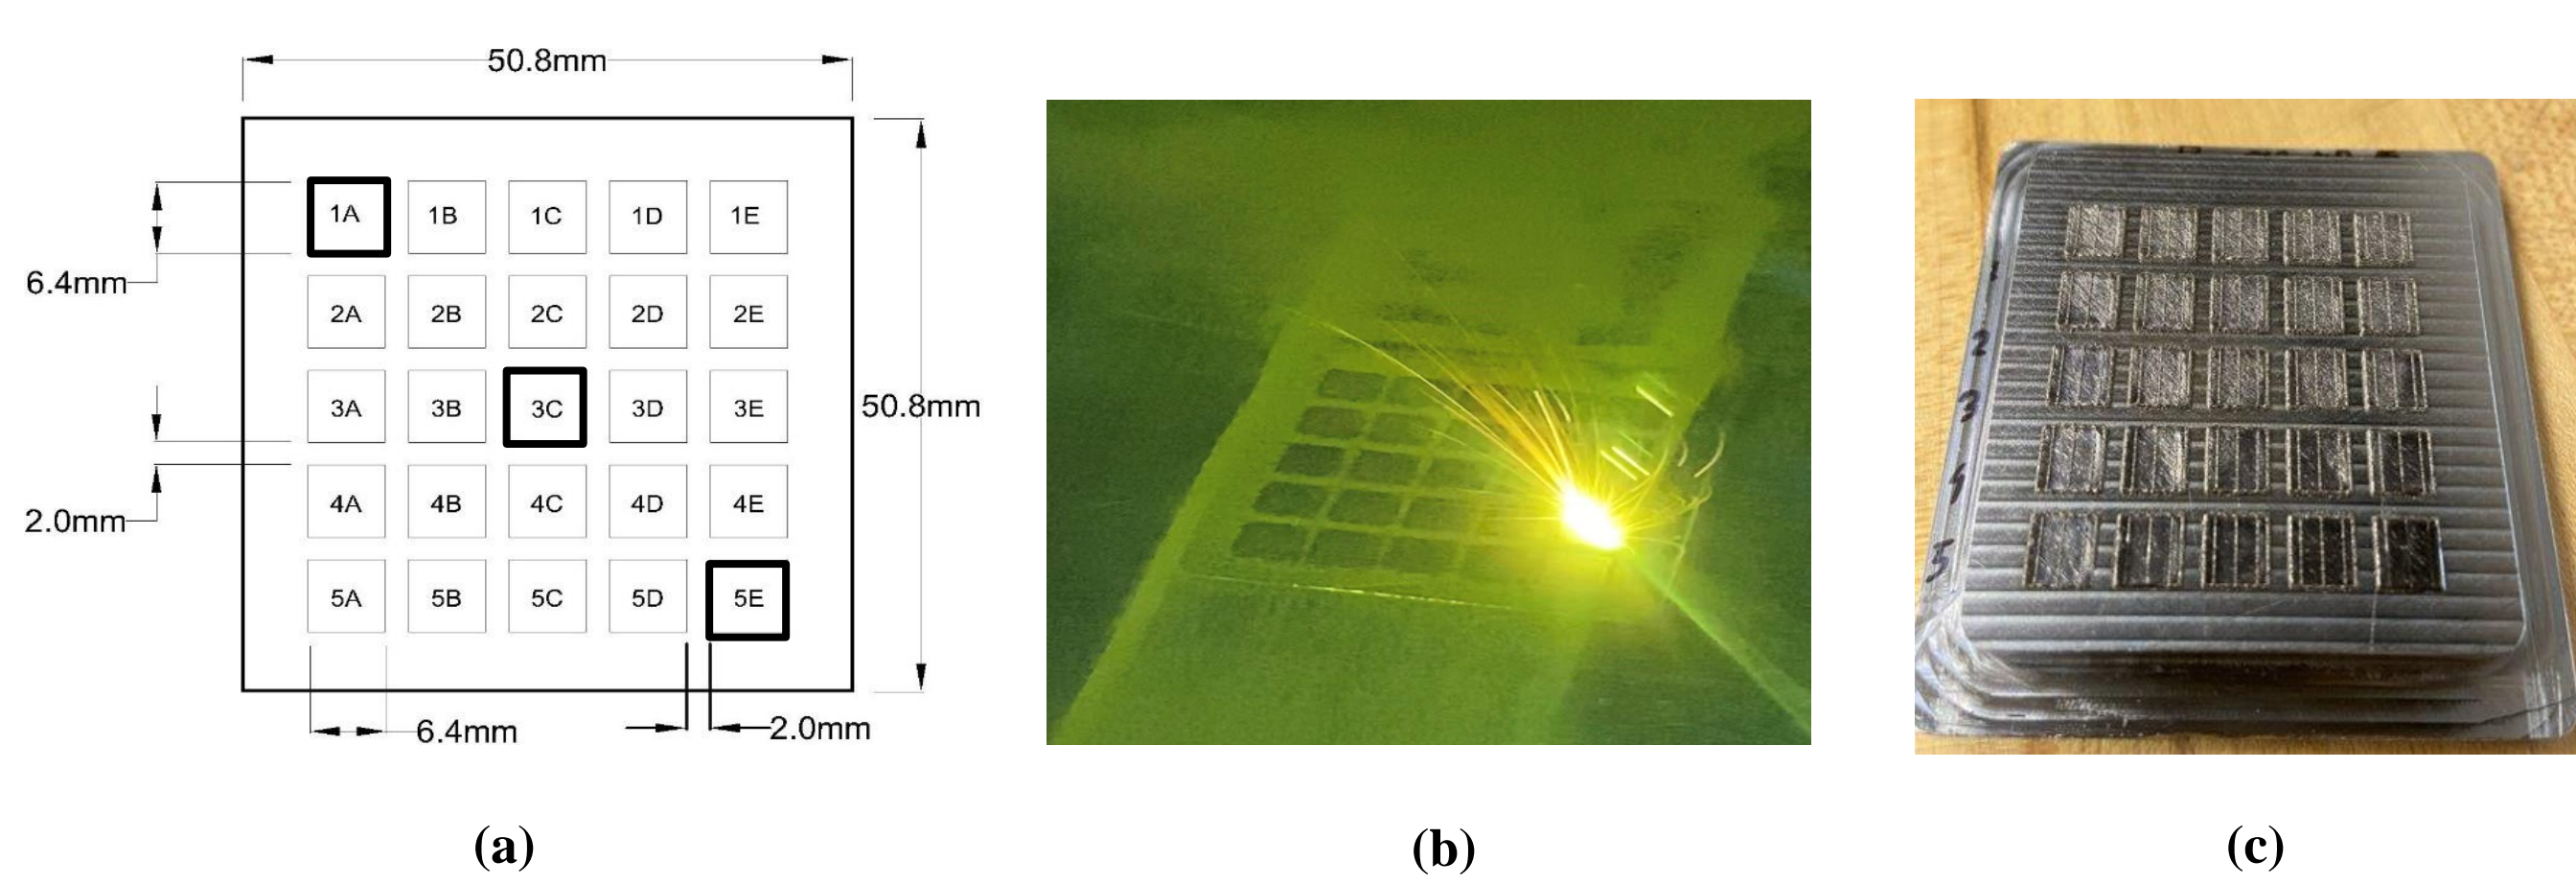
(a) 2D Design of test series, (b) laser melting process, and (c) SLM printed final part
